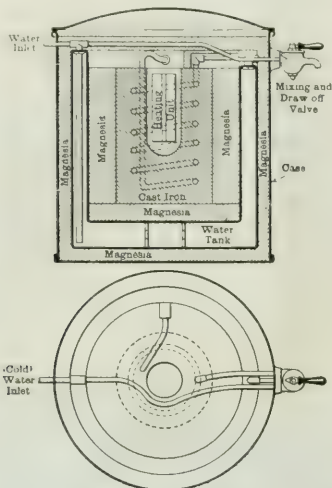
PLAN AND SECTION OF "THEROL" ELECTRIC HEATER.
